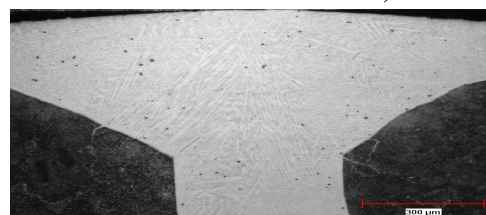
Optical micrograph of DS IN738 laser weld made perpendicular to solidification direction, i.e., T.S. weld (No crack observed on this particular section)
